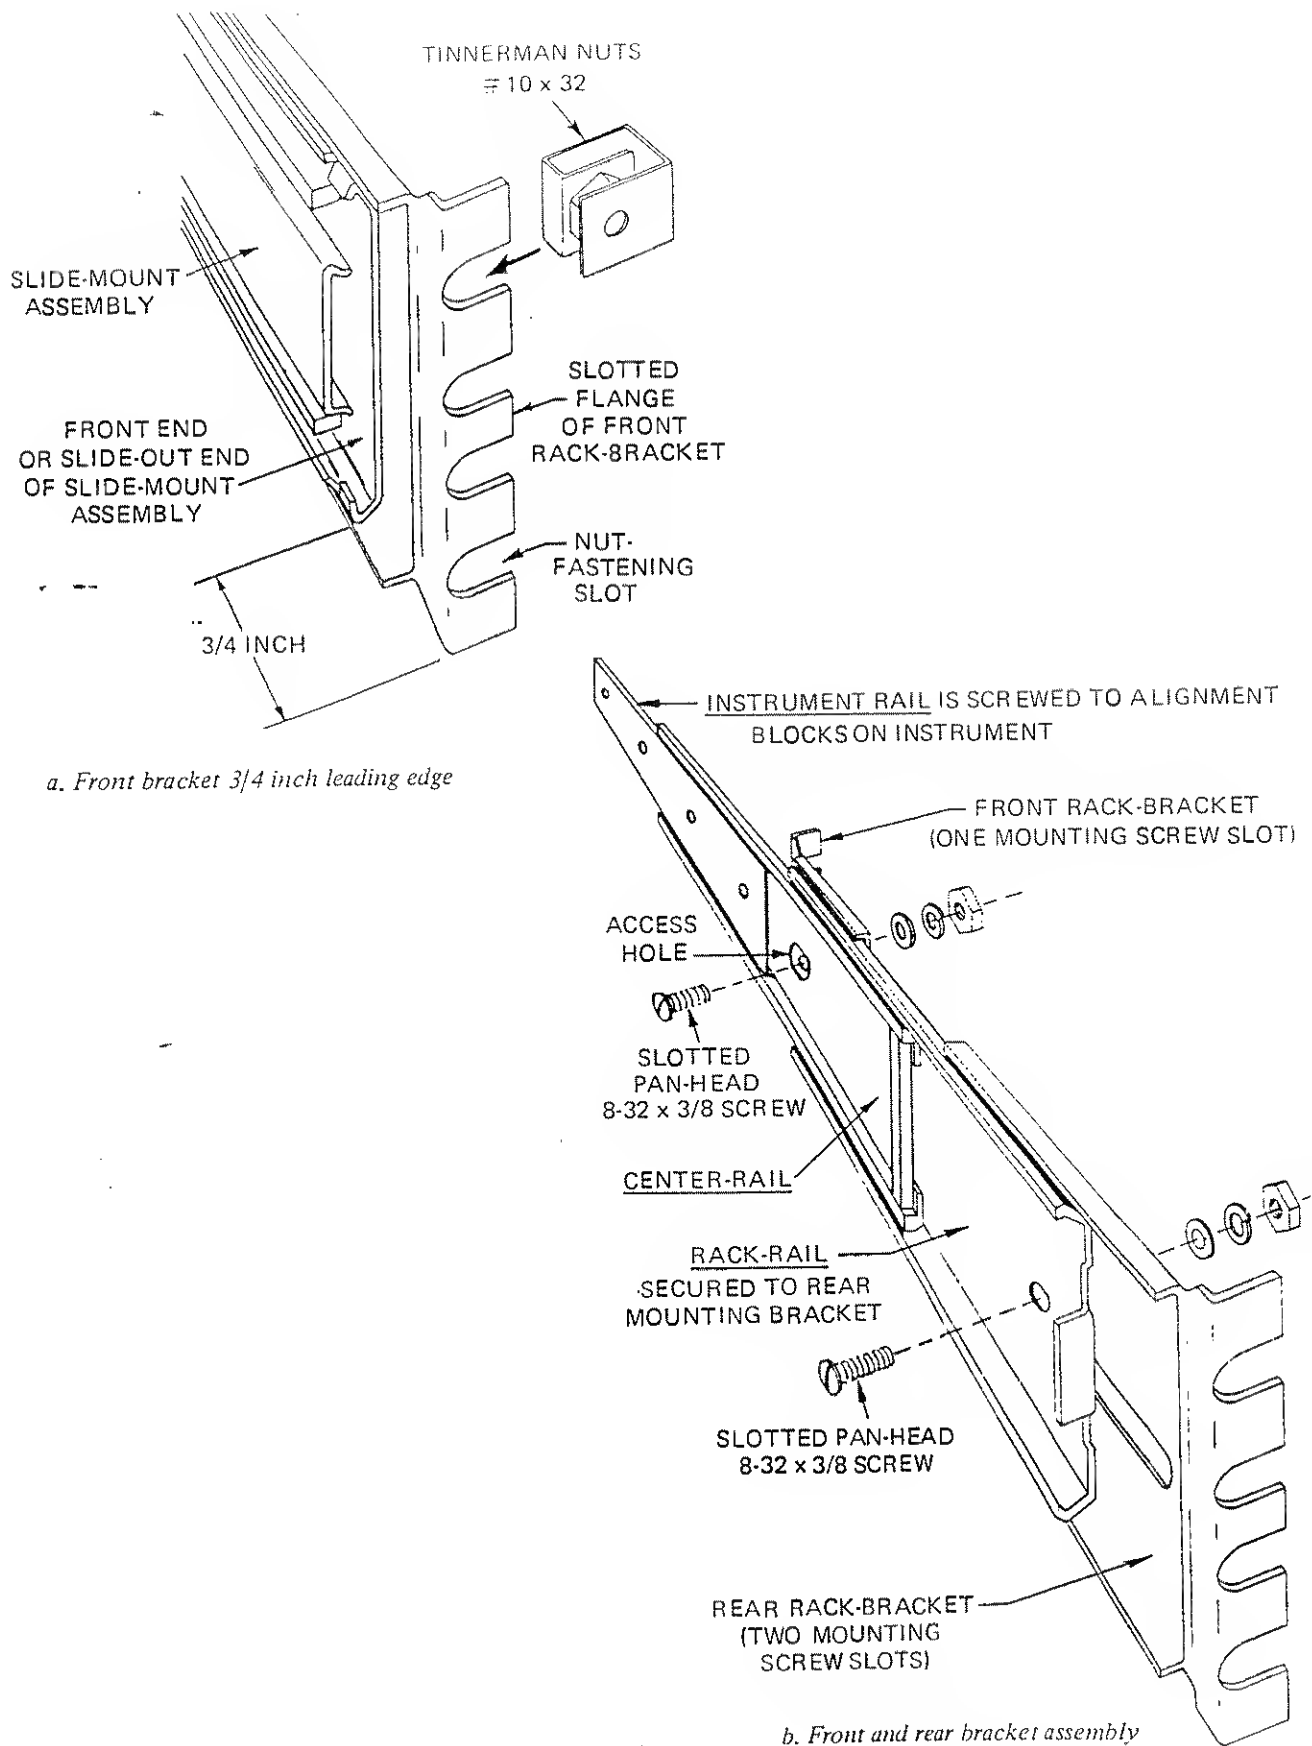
A/B-Slide-Mount and Bracket Assembly
